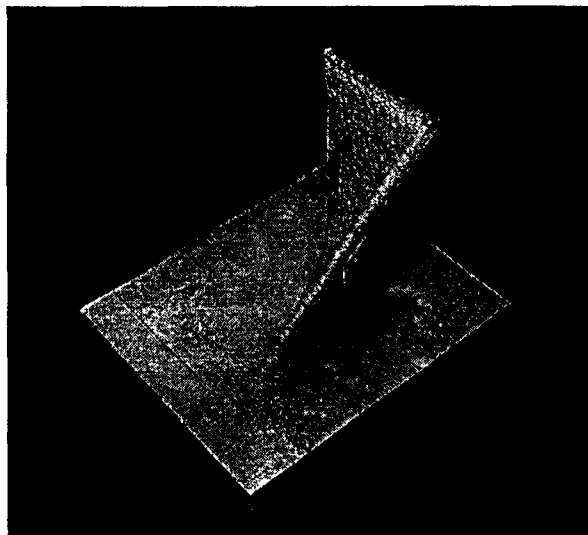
Photograph of a part with 316 stainless steel directly from a CAD model.
